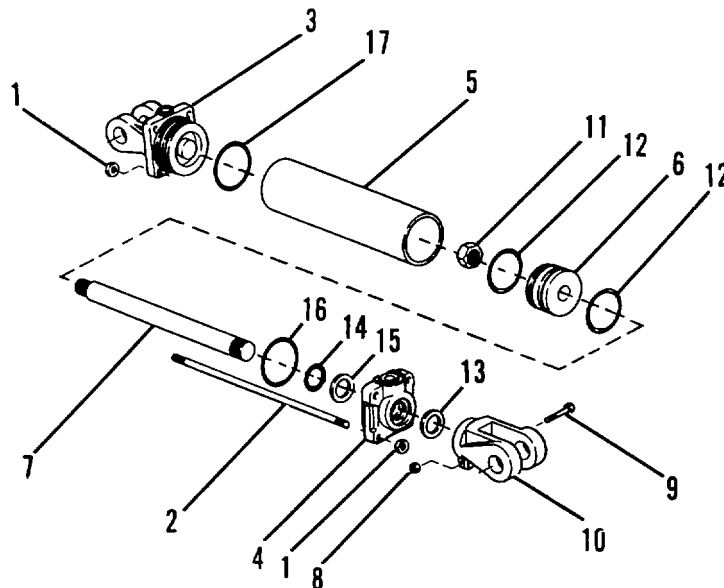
Stabilizer Cylinder Assembly (Sheet 2 of 2) .
